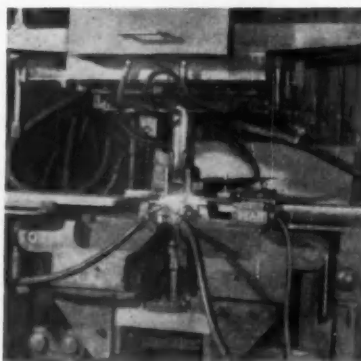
Note universal fixturing table and simple dies used for welding a yoke assembly.
